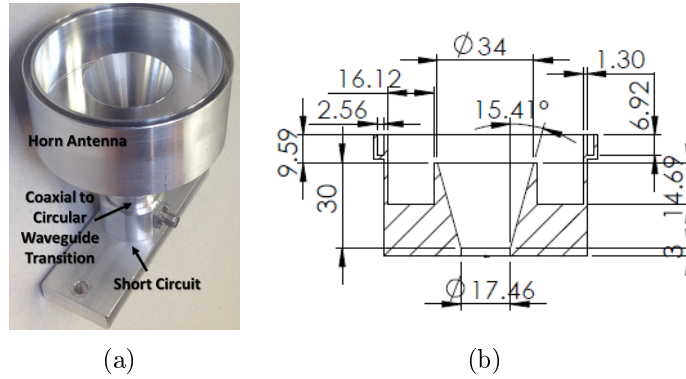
The proposed coaxial surrounding the conical circular horn with choke. (a) Fabricated model. (b) A cross section view to the design details with all dimensions in millimeter.
